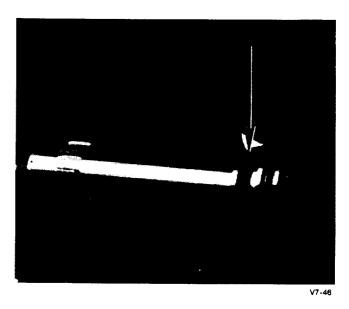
Conical Nozzie Showing Extruded O-Ring after Cold Flow Test
